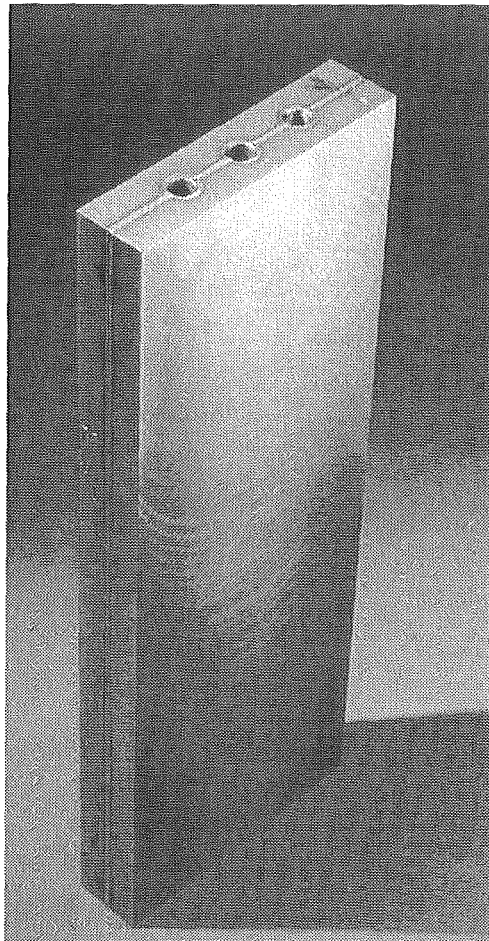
Seal welded WCLL FW plate before diffusion welding in a HIP facility
